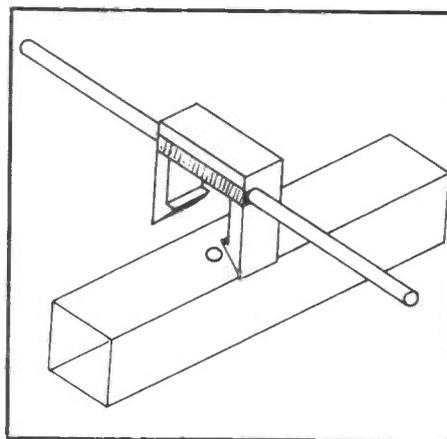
Fitting the element in plastic clip and mounting the clip on the boom
